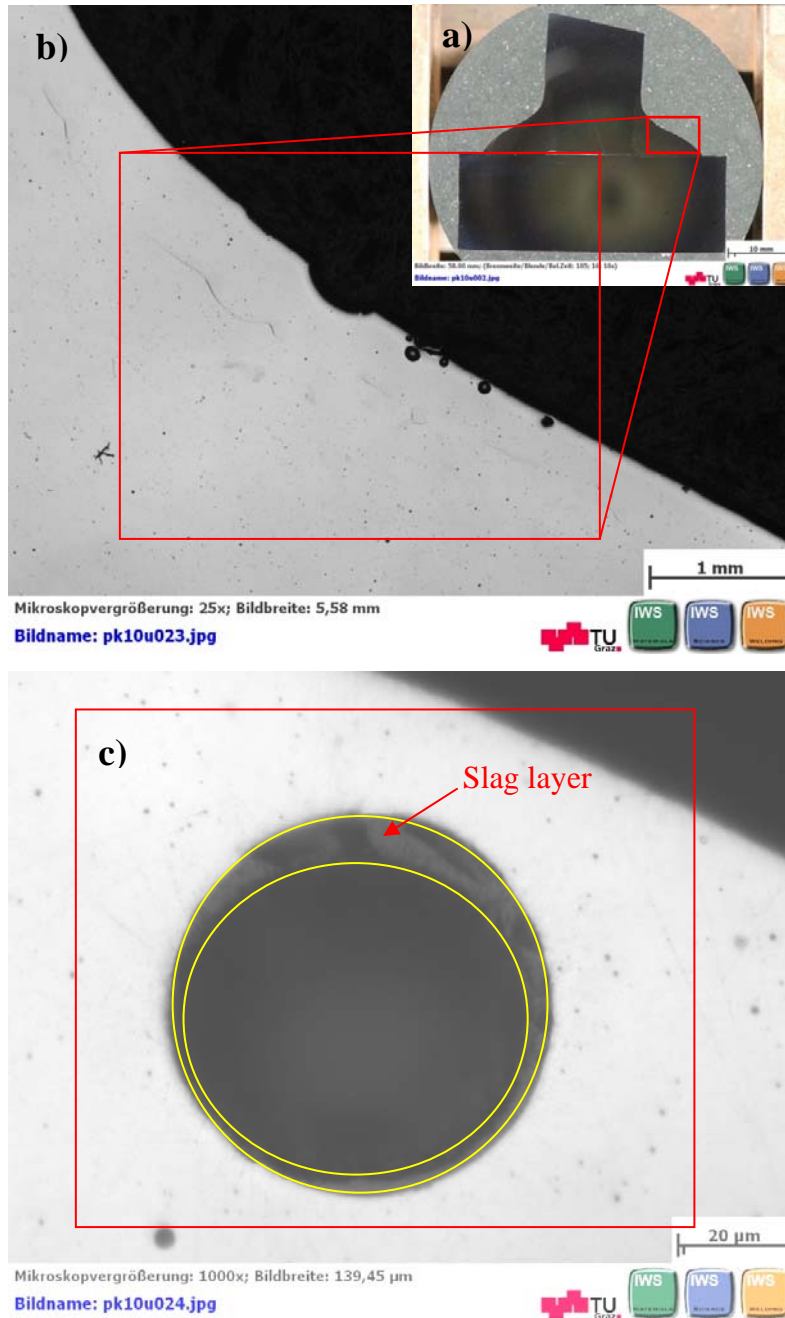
Masse 63: Dimples pores and slag inclusions in a fillet weld (S355 base material)
